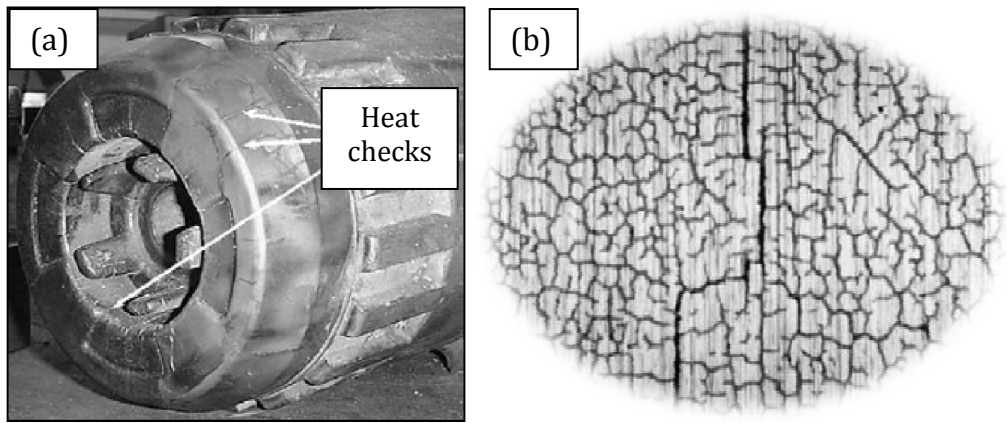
(a) Heat checking in die-casting dies and (b) close-up view of heat checks [13].
